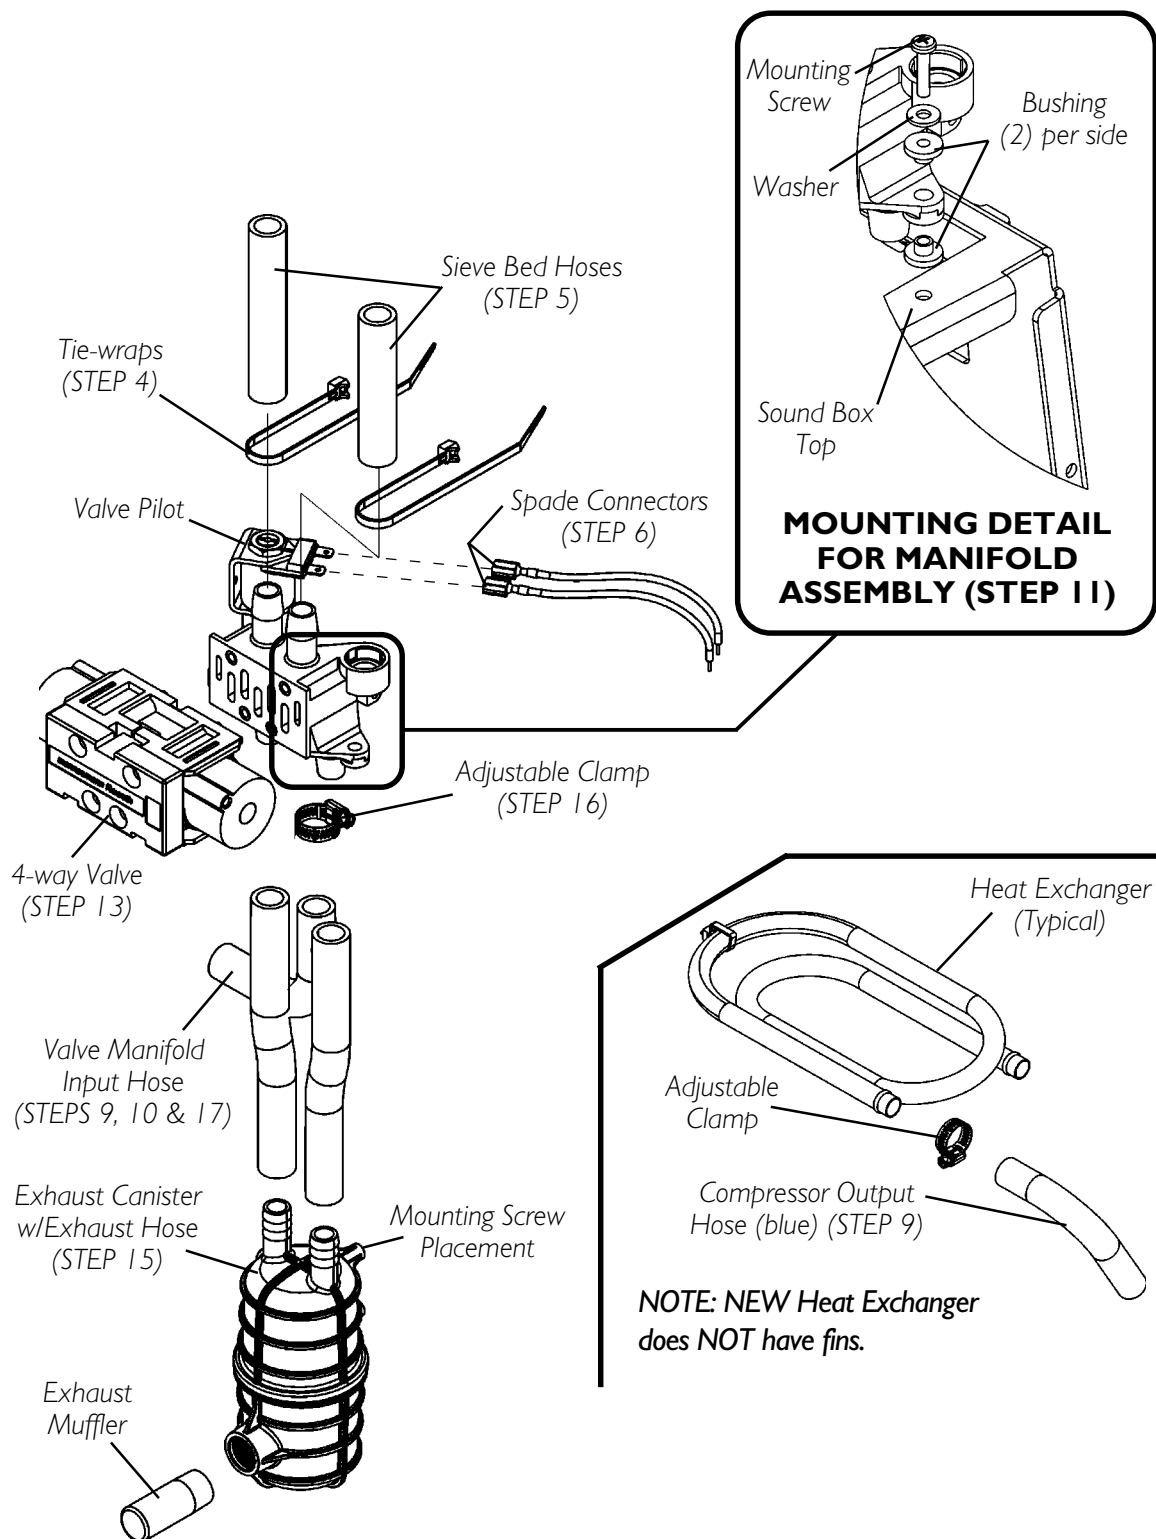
REPLACING 4-WAY VALVE MANIFOLD ASSEMBLY
